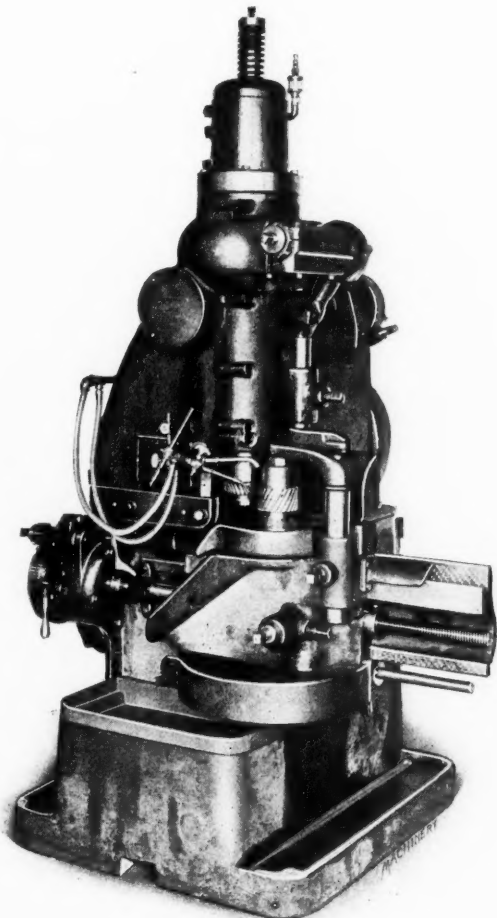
Helical Gear Shaper built by the Fellows Gear Shaper Co.
